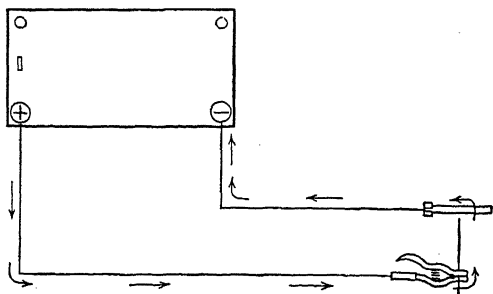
Reverse polarity. Direction of flow of current when the ground plate is on the negative side of the welding machine.
